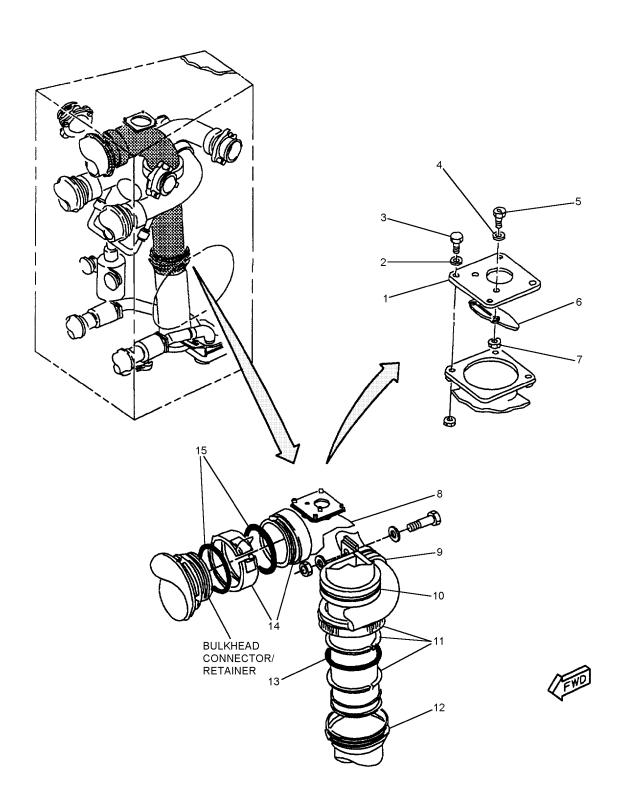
Siphon Breaker Check Valve (5VAS545) (Sheet 1)
